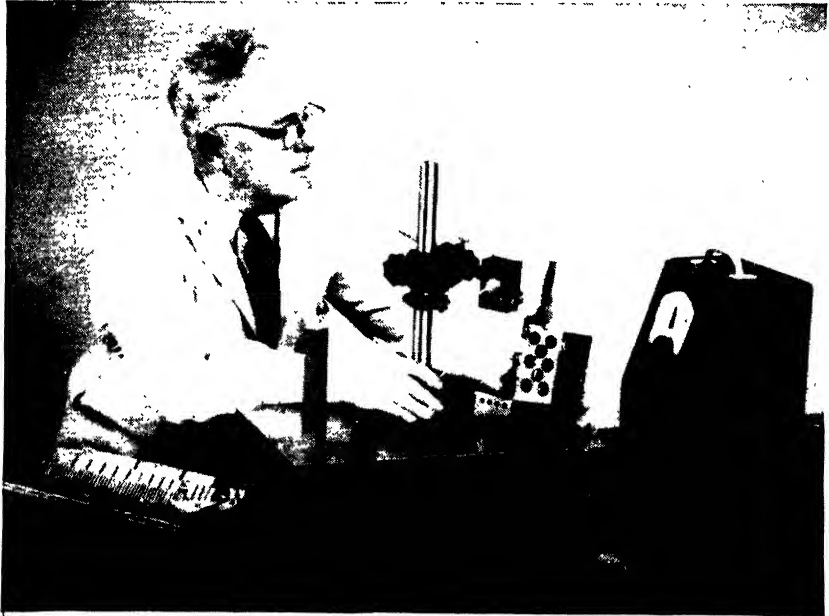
16. Using an Electrolimit Height gage to transfer an exact dimension from a stack of Hoke gage blocks to check the profile of a railroad gage. (Courtesy of Pratt & Whitney Division, Niles-Bement-Pond Company.)
